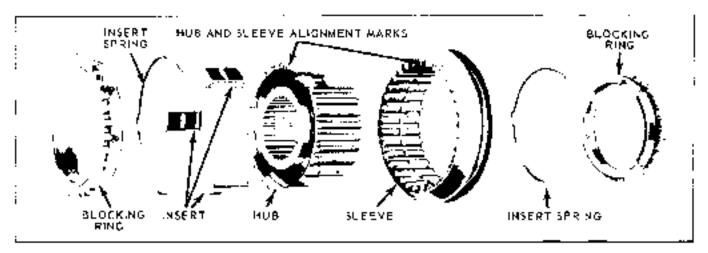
A -14 Expladed View of Second and Third Synchronizer.
